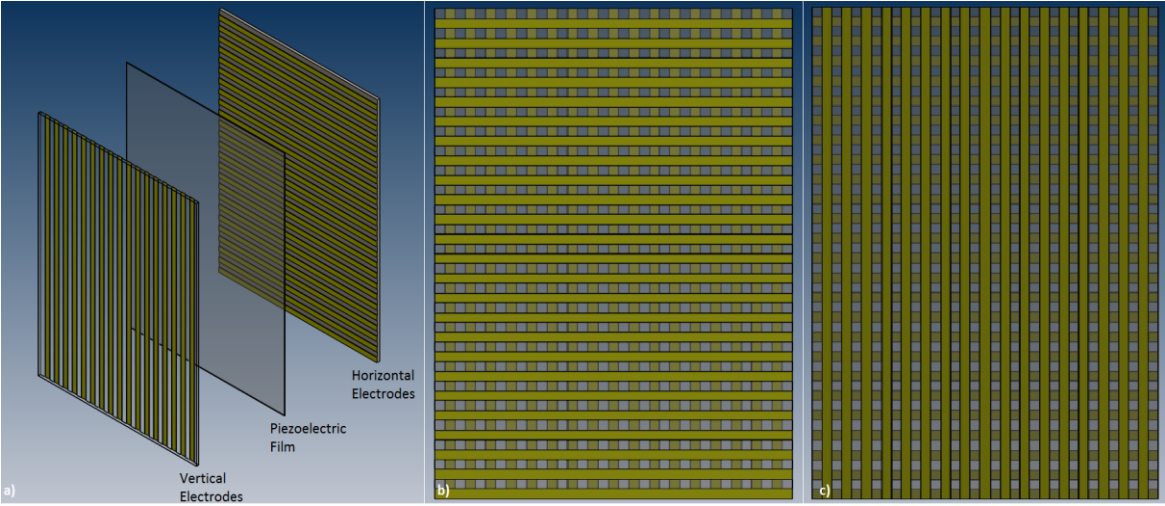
3D model of sensor assembly and layer structure, a) exploded view, b) top view and c) bottom view.
